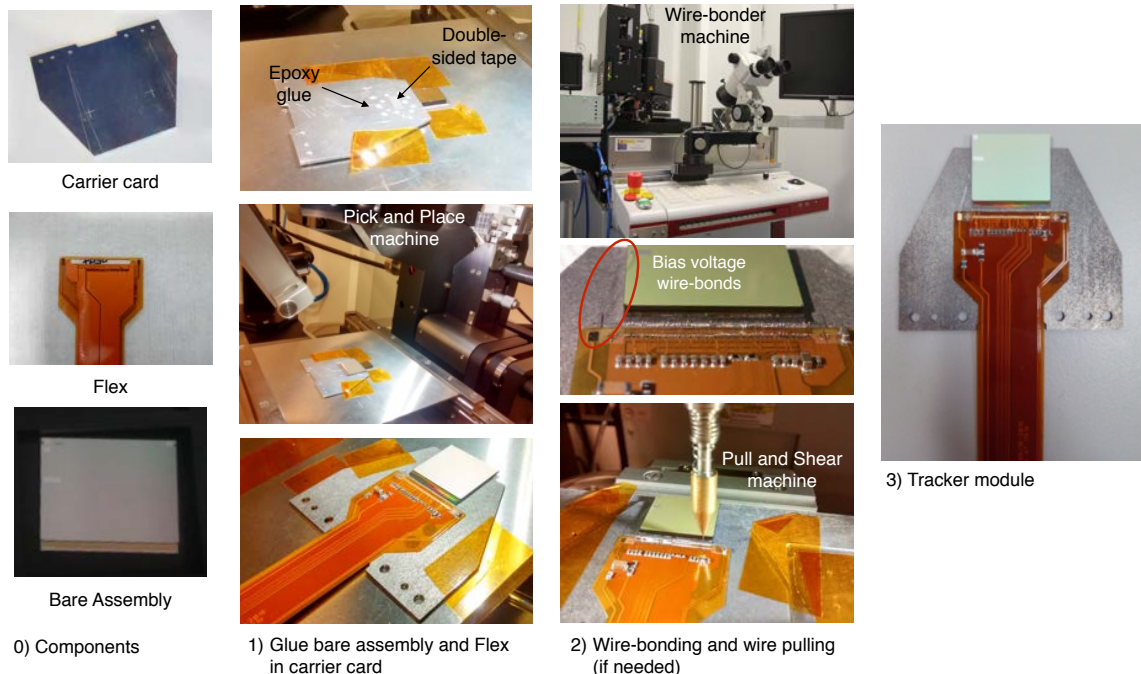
Pictures showing the different steps in the assembly stage: 0) the components of a module, 1) the glueing of the bare assembly and the flex onto the carrier card, 2) the wire-bonding and wire pulling (if needed), and 4) the final tracker module.
